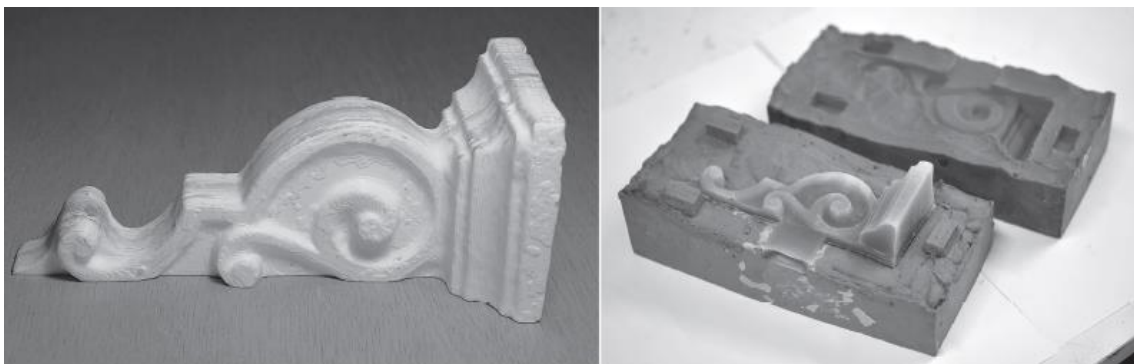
The Printed Model (Left) and The Silicone Mould (Right) ⁹
